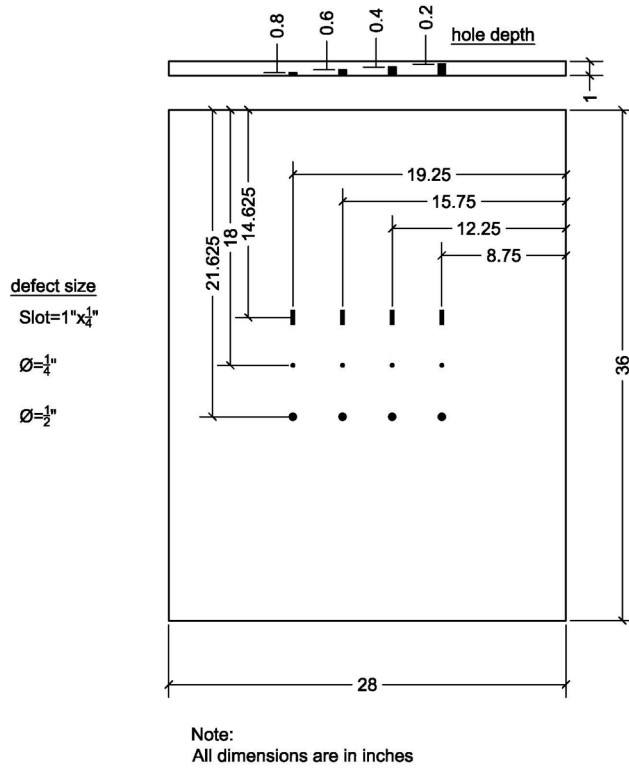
Specimen II design drawing showing type and location of defects in the weld.
